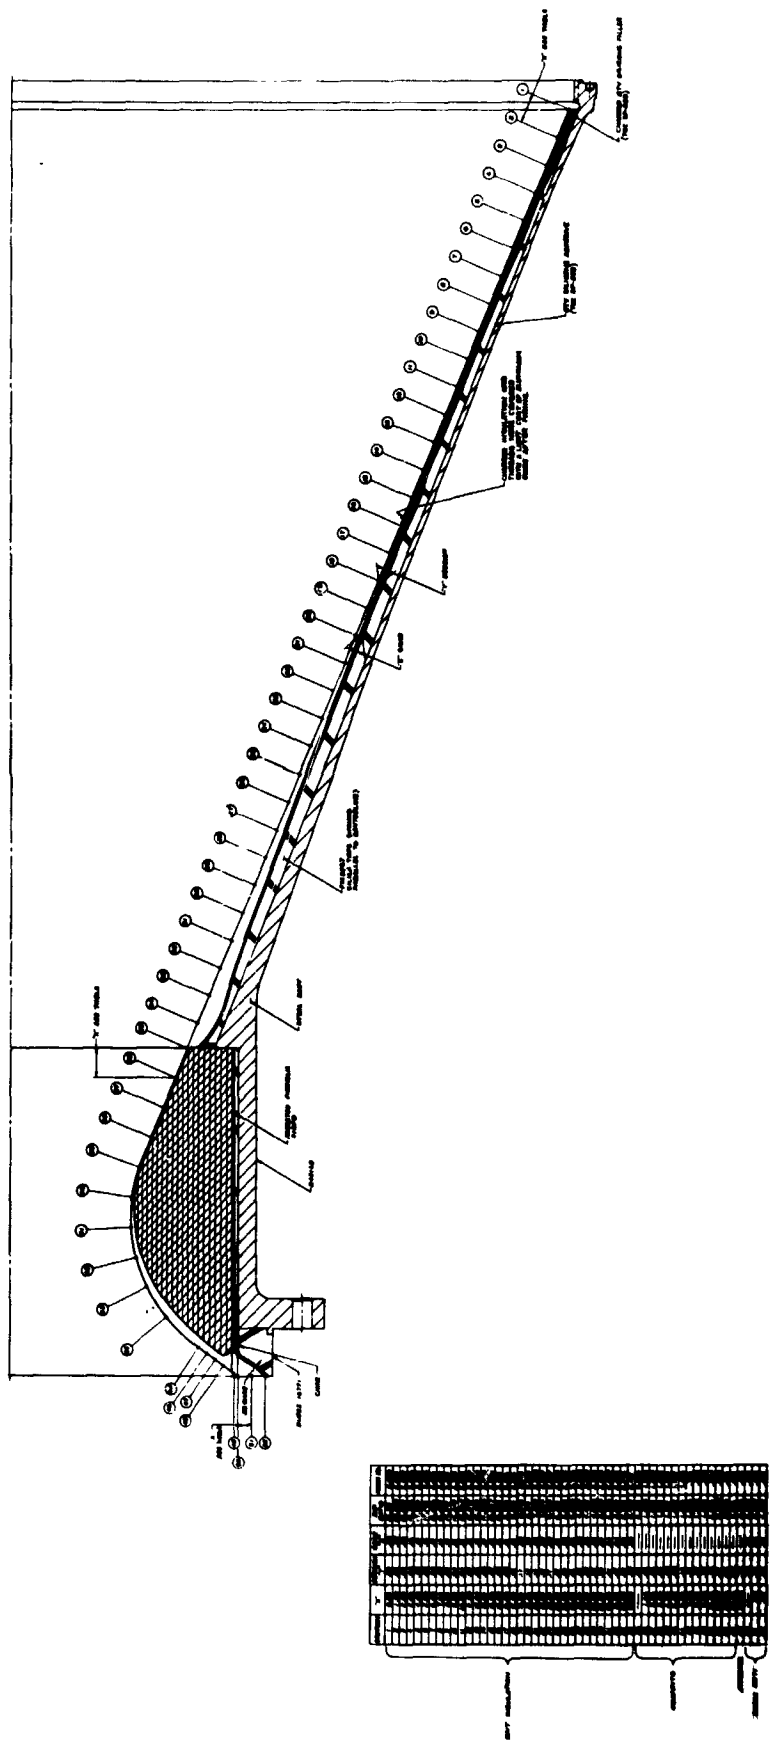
A. Erosion Profile of Nozzle Assembly Used on TX354 Motor 5.
